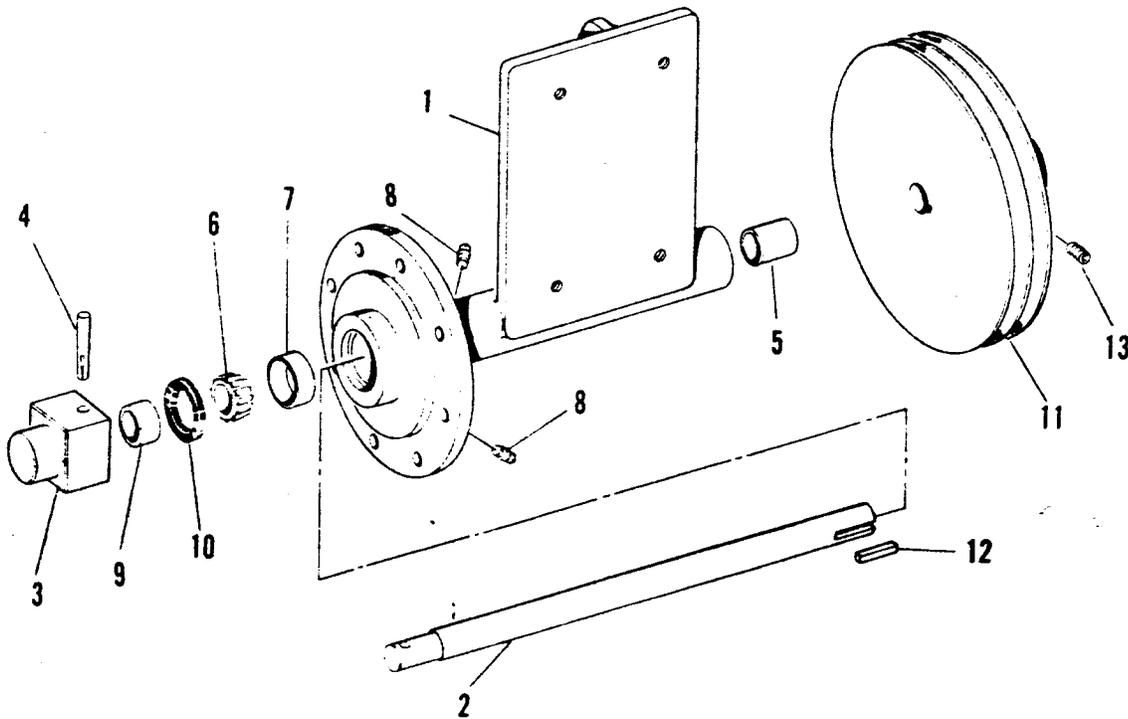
COMPLETE BEARING COLUMN (Available As Assembly) S-15 & XC-15) - P4-5219 XC-30 - P4-5220 XC-60 - P4-5221
